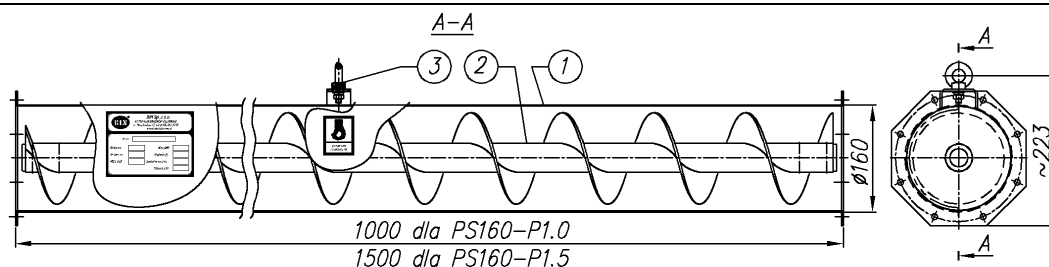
PS160-P1.0- Screw conveyor  $\varnothing 160\text{ mm}$  – 1m length
